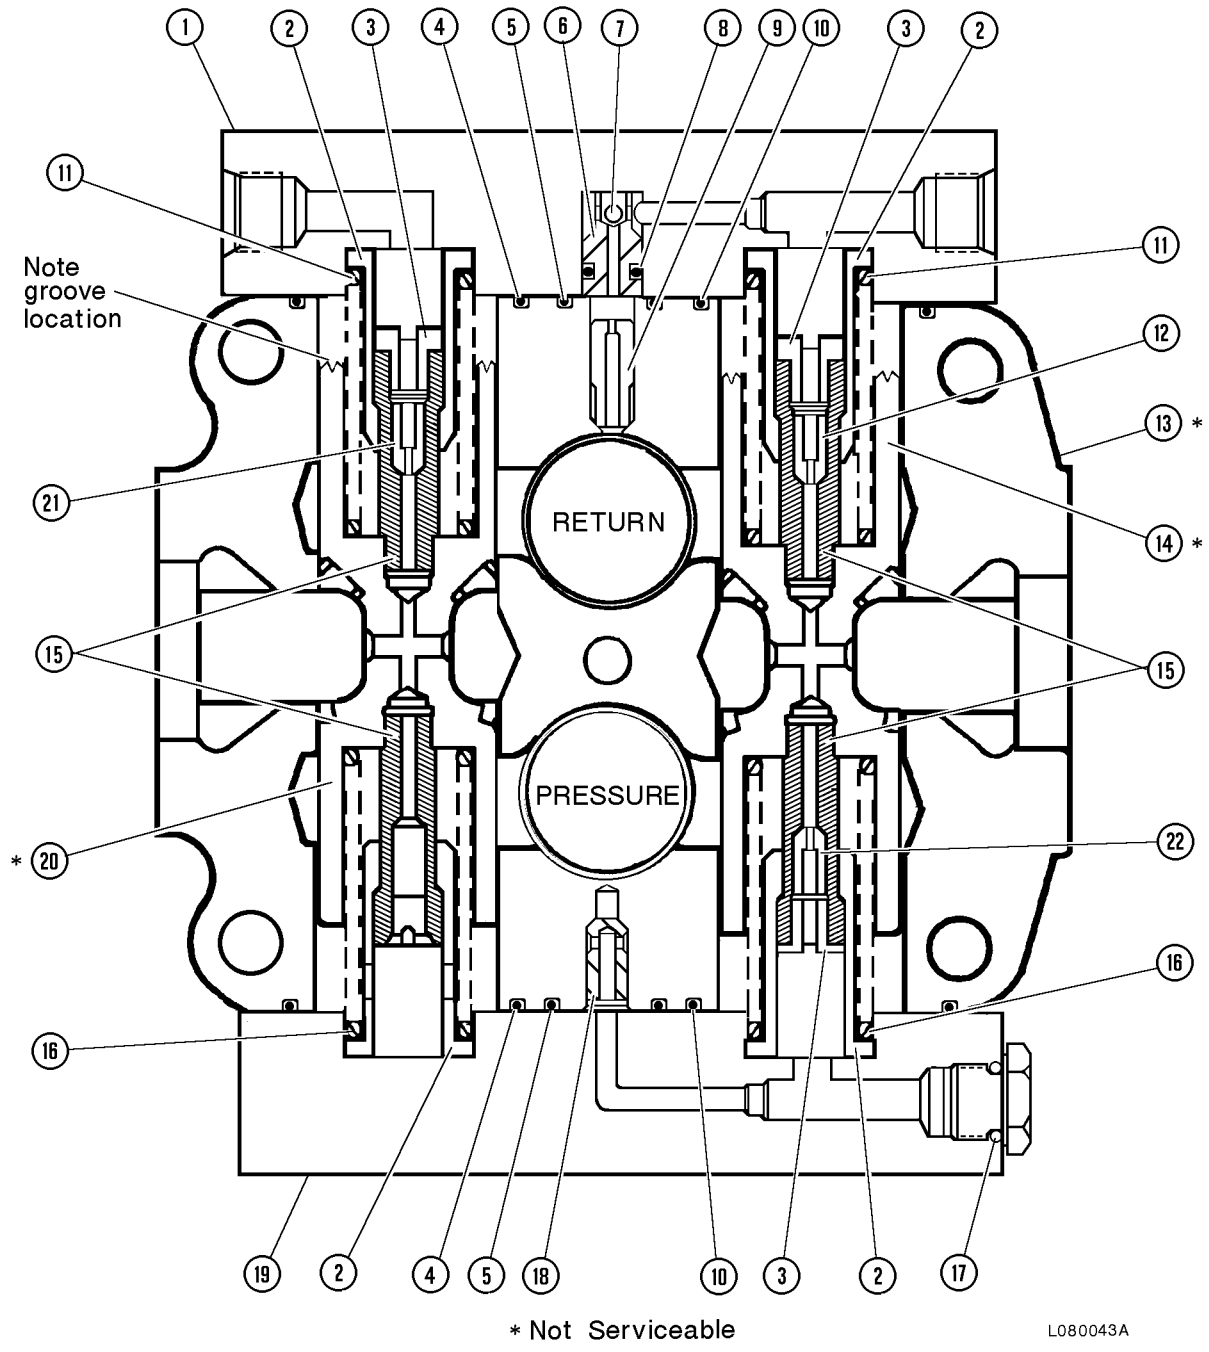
WORK PORTS SPOOL SECTION ASSEMBLY
